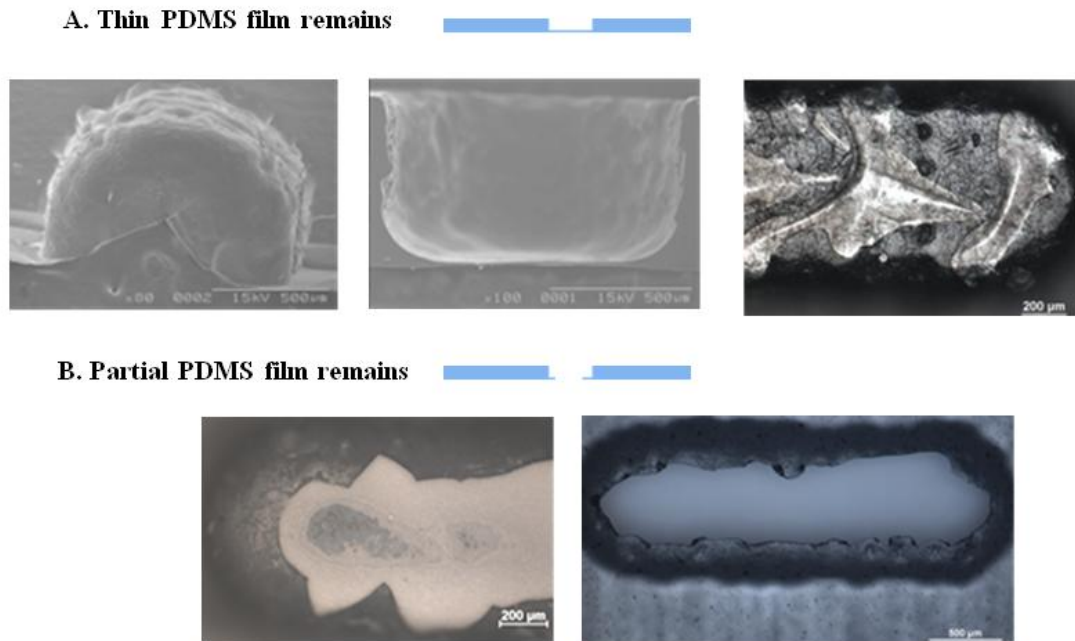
Problems when using 3D printed mold to make through-hole PDMS
